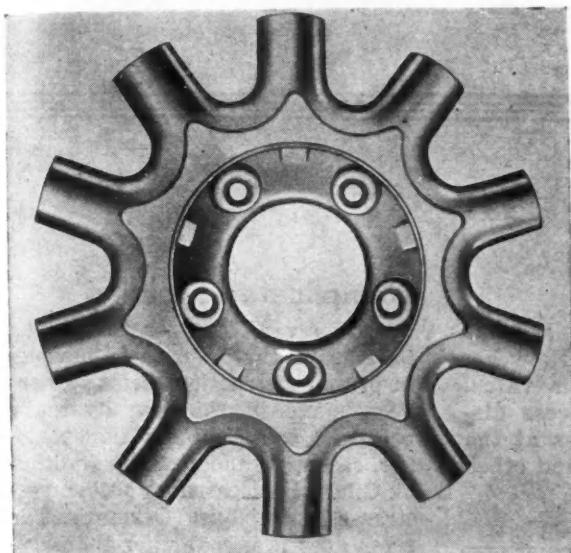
Stamping of two-ply stainless steel used in artillery type automobile wheel
